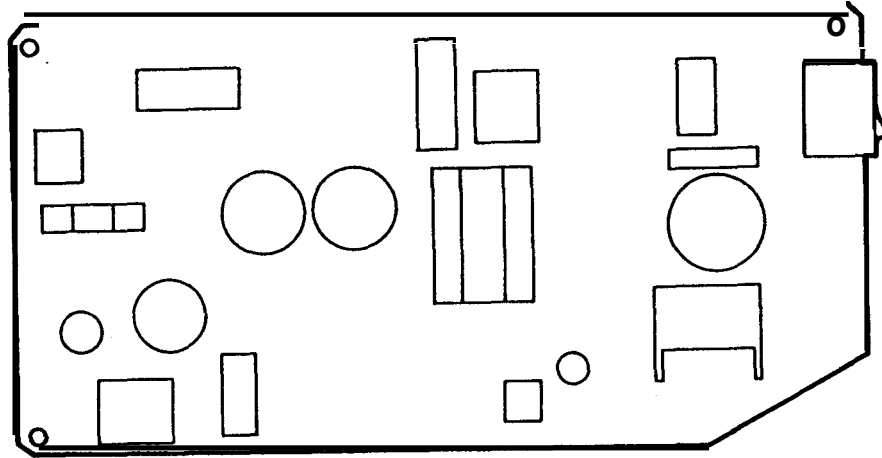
C106 PSB/PSE BOARD Component Layout
